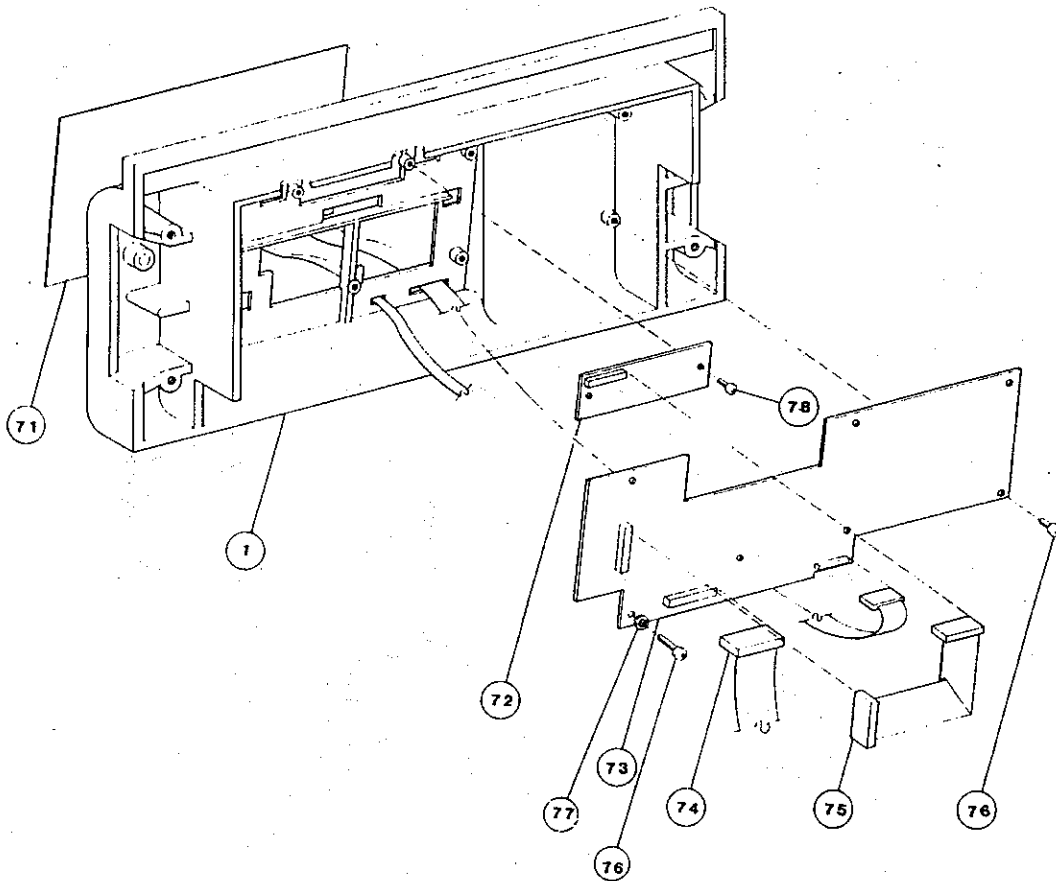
PARTS LOCATION DIAGRAM, CONTROLLER ASSEMBLY
